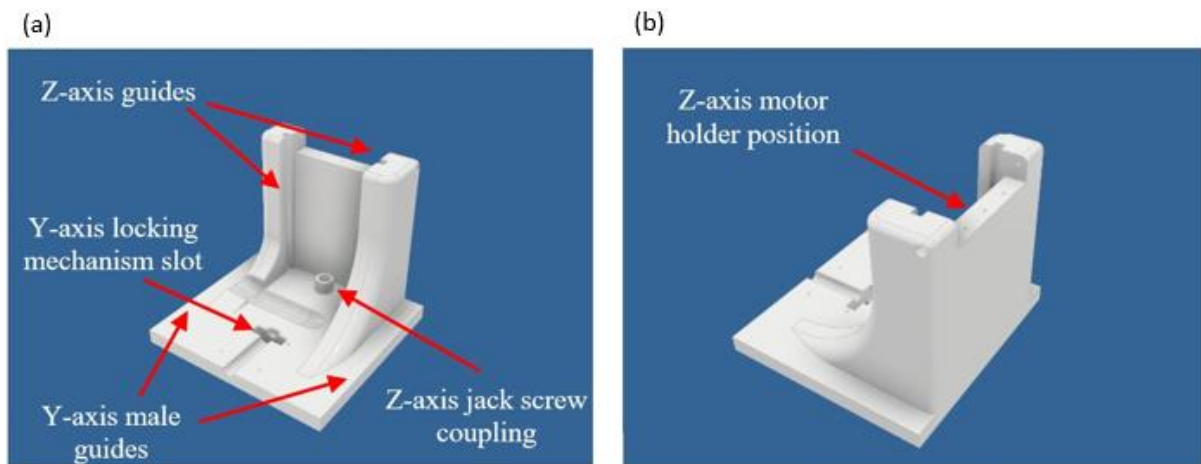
Z-axis frame a) front view, and b) rear view.
